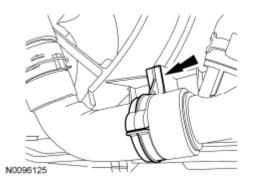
Locating Lower Radiator Hose Pin-Type Retainer Of Cooling Fan Shroud Courtesy of FORD MOTOR CO.
